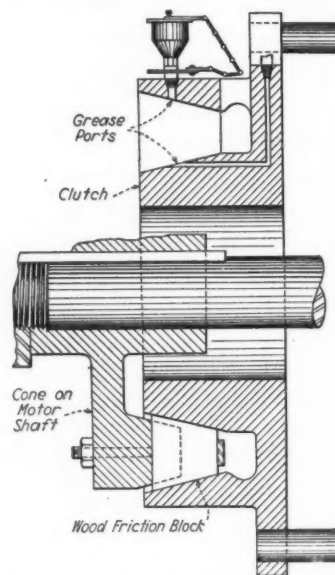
APPLYING GREASE CUPS TO REDUCE MOTOR BRAKE FAILURES AND COSTS
